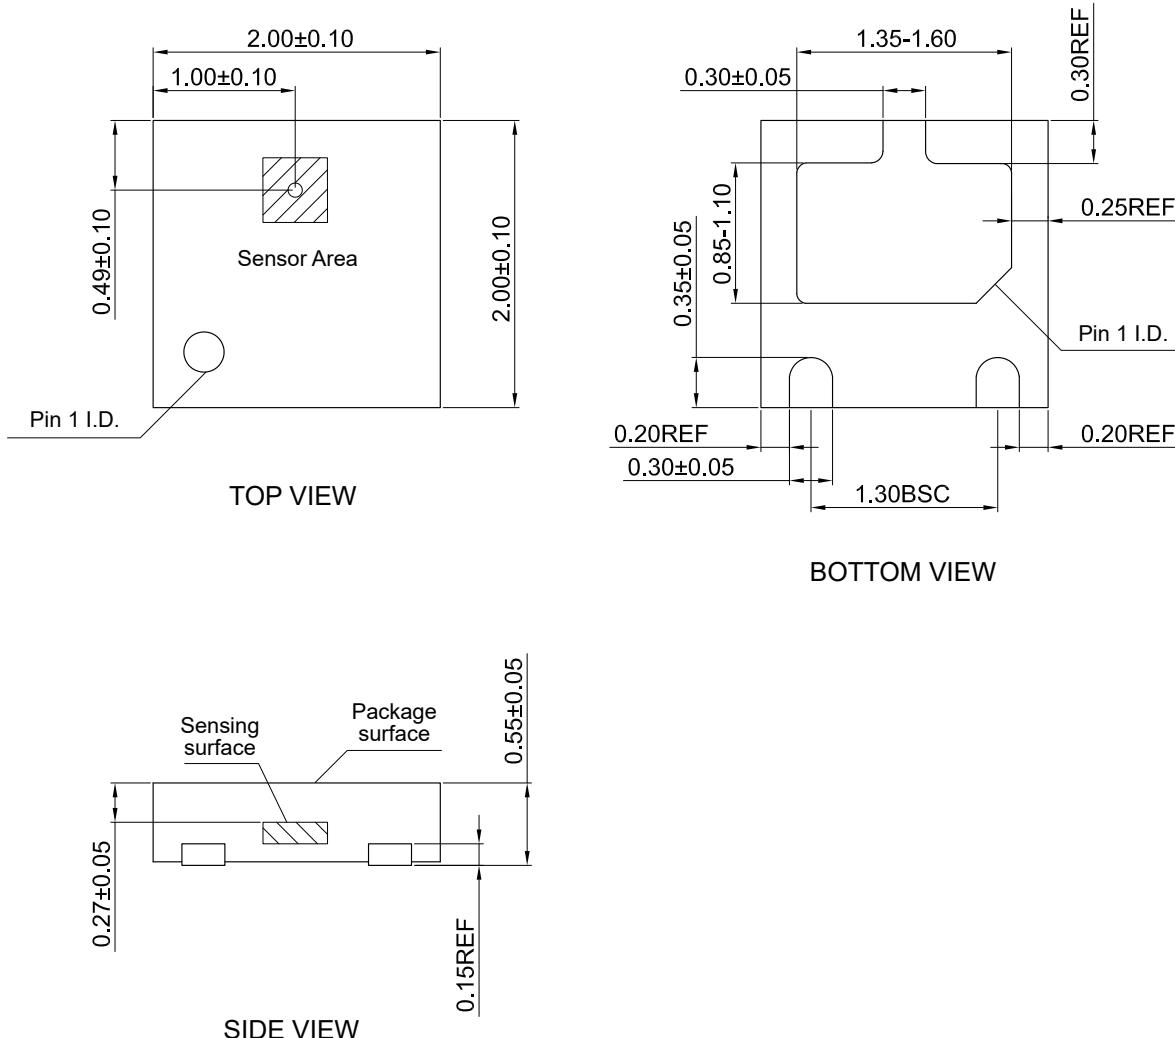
Package outline of DFN3L (2×2×0.55) (unit: mm)
